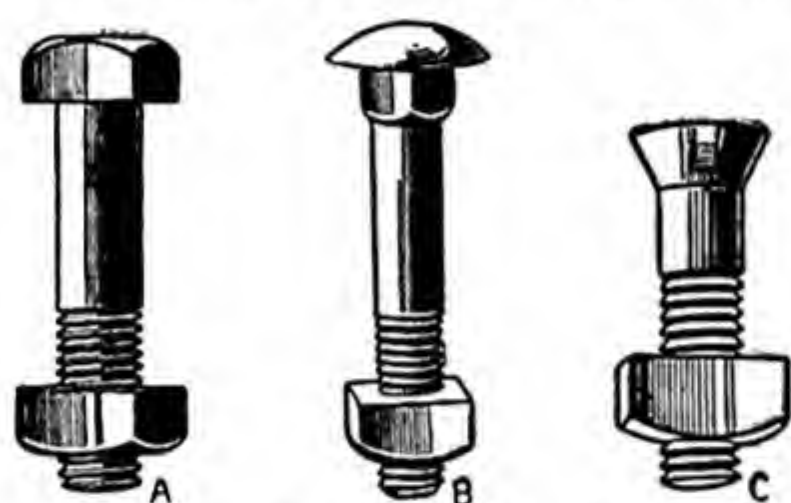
Types of bolt: A, machine bolt with nut; B, carriage bolt with nut; C, plow bolt with nut.
